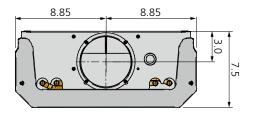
Dimensions ADRIATIC Prisma, end view air connection.
